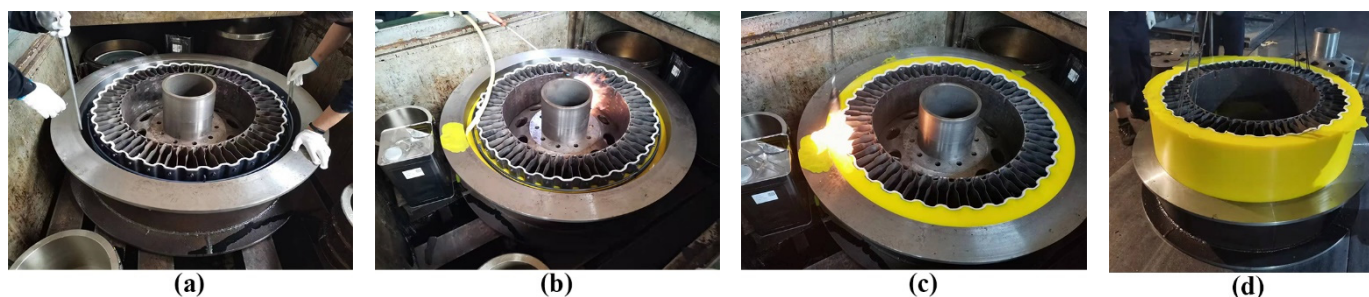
Tread forming process: (a) mold positioning and temperature measurement; (b,c) tread pouring; and (d) tread demolding.
